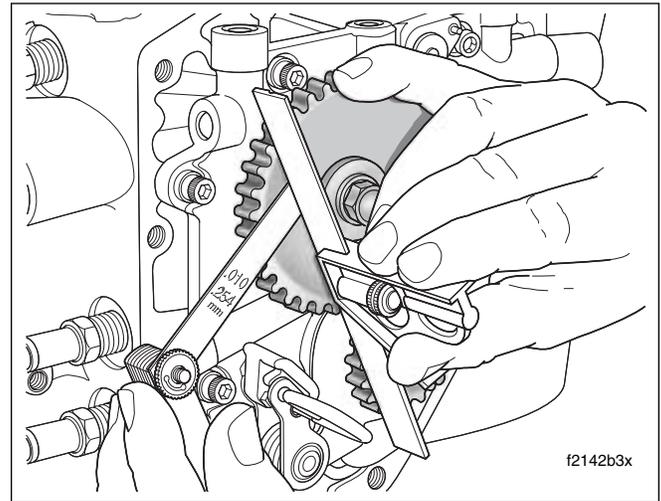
Check Alignment of Crank and Primary Cam Sprocket Faces
